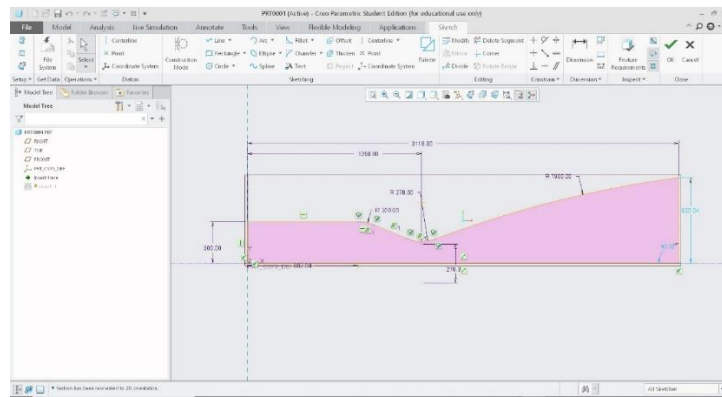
The RD-106 Rocket Engine sketch in Creo
